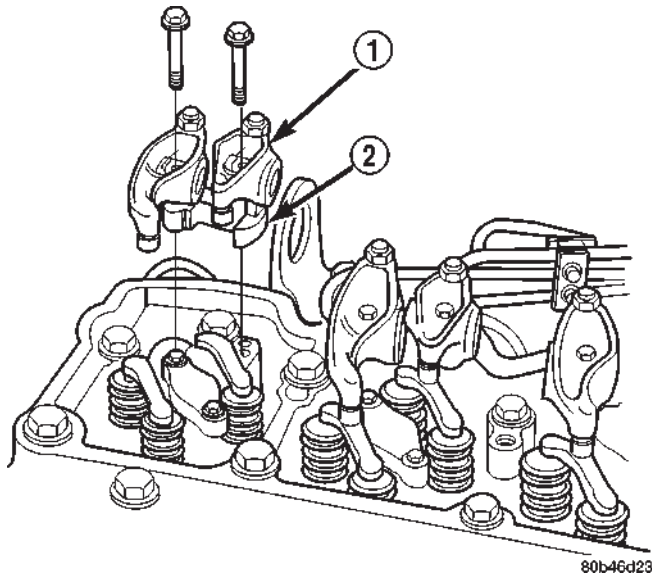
Rocker Arm and Pedestal—Removal/Installation
